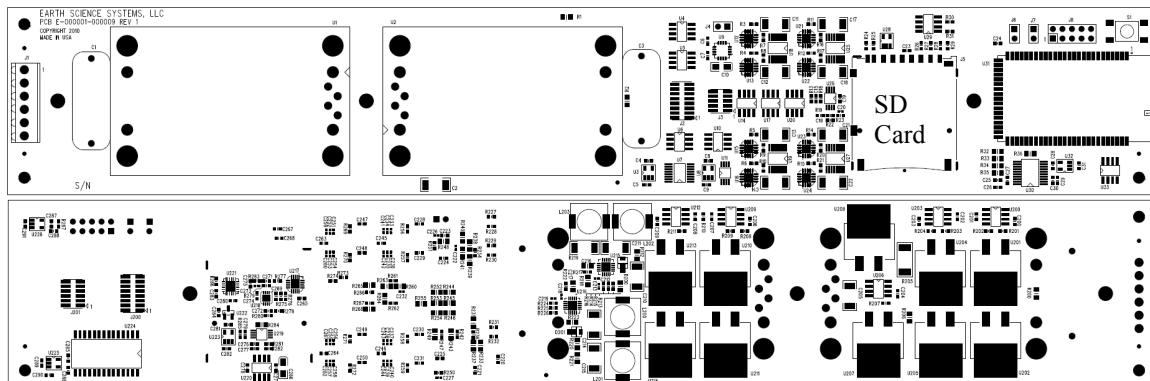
Top panel shows component locations for the top side of the circuit board, and the bottom panel shows component locations for the bottom side of the board. Connectors J1 (located on the left side of the top side of the board) and J3 (located in the center of the top side of the board) are used to interface with the external world.
